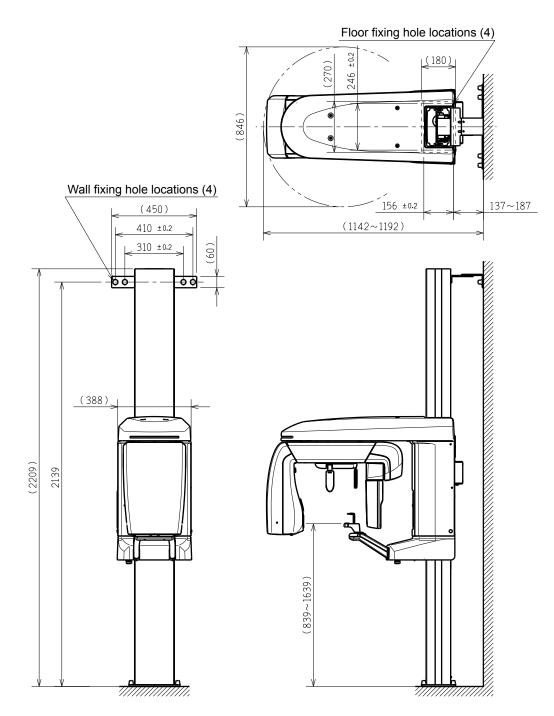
Fixing hole location measurements (Standing position wall-mount: Panoramic type)
